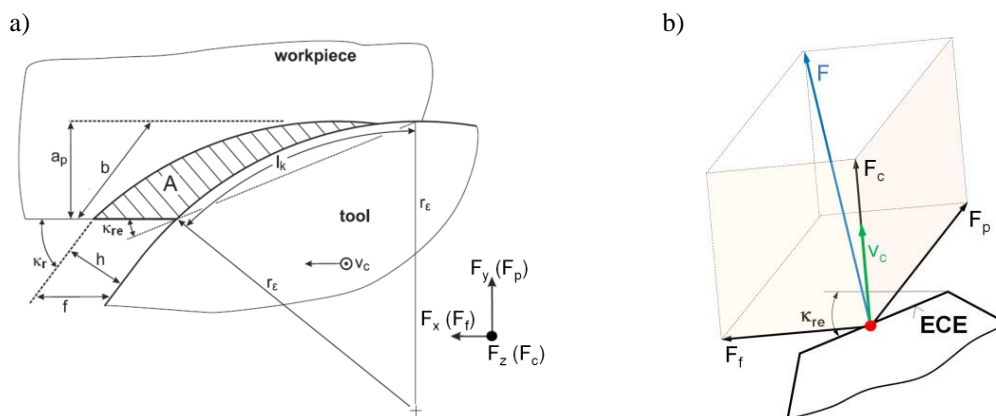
Dimensioning of the cross-section area (a) and equivalent cutting edge – ECE (b), [11]
